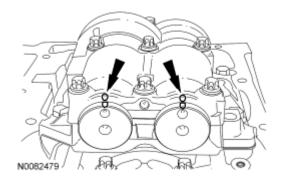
Locating Balancer Unit And Shafts Reference Mark
